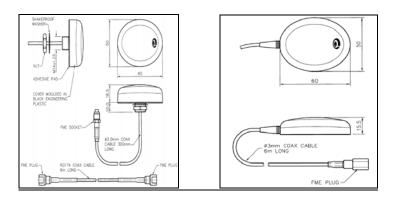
Mechanical Drawing GPS Panel and Magnetic Mount
